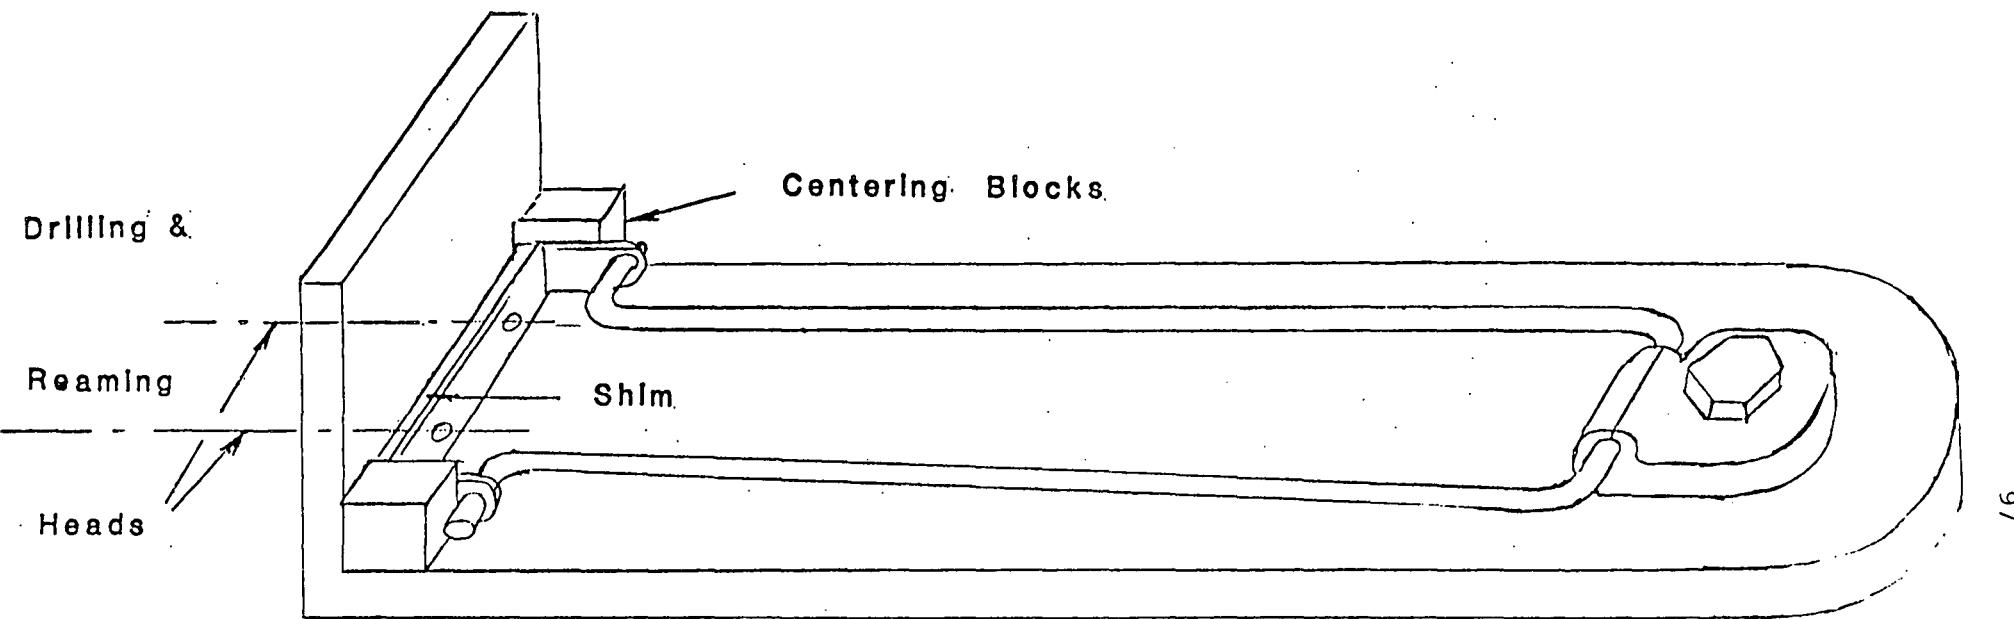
ASSEMBLY FIXTURE TO ESTABLISH FOCAL LENGTH DISTANCE ON RECEIVER TUBE SUPPORT - MIDWAY STEEL, THROUGH
